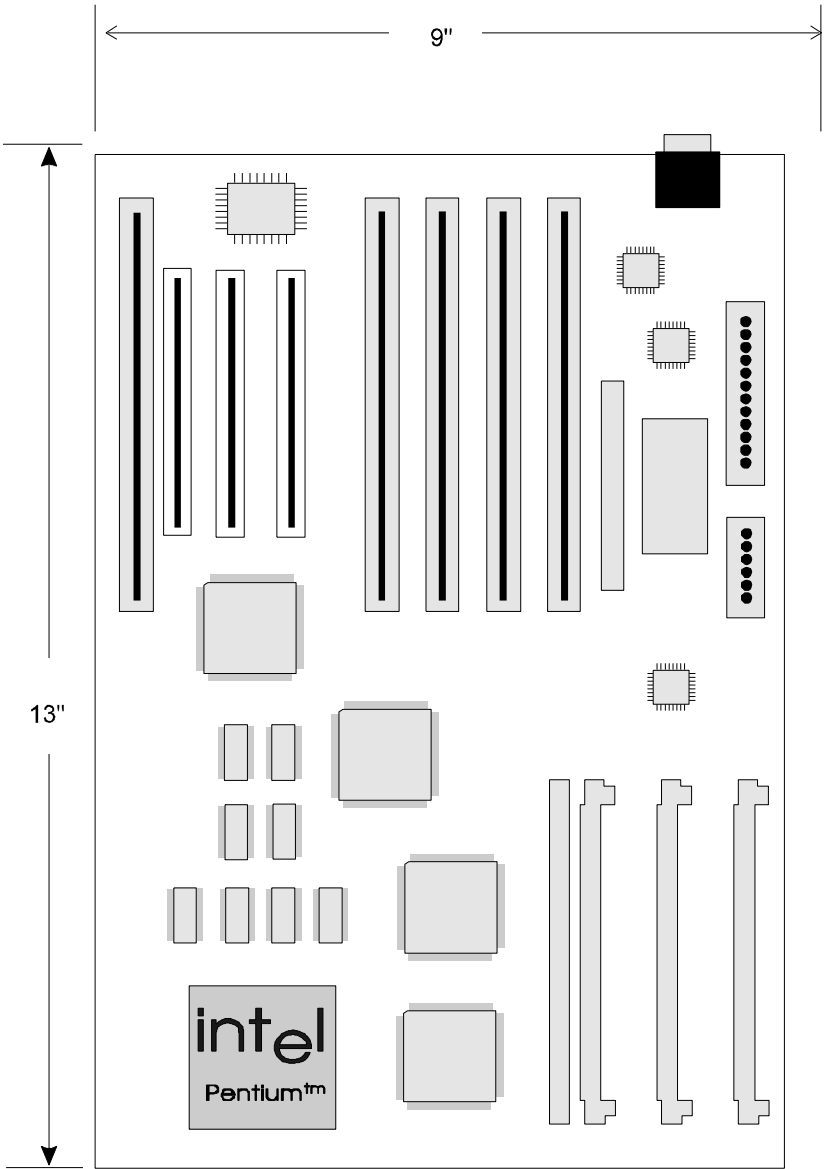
Classic/PCI Pentium CPU Baby-AT Motherboard Dimensions
